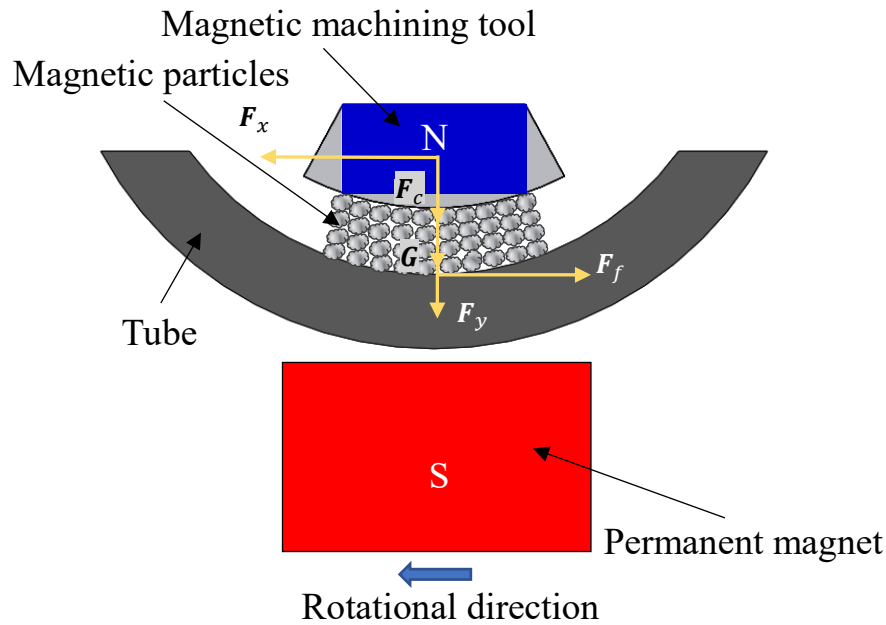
Force analysis model diagram of the magnetic machining tool
